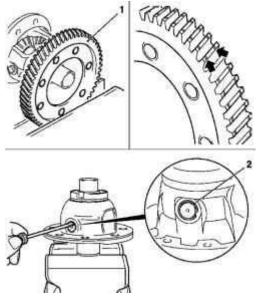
Removing the locking rings: 1 - toothing differential 2 - retaining rings
